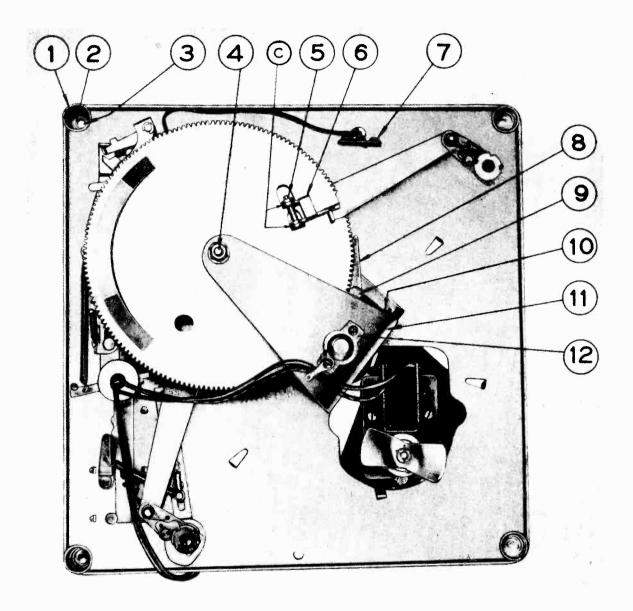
FIGURE II - TOP VIEW OF RECORD CHANGER, DISASSEMBLED
